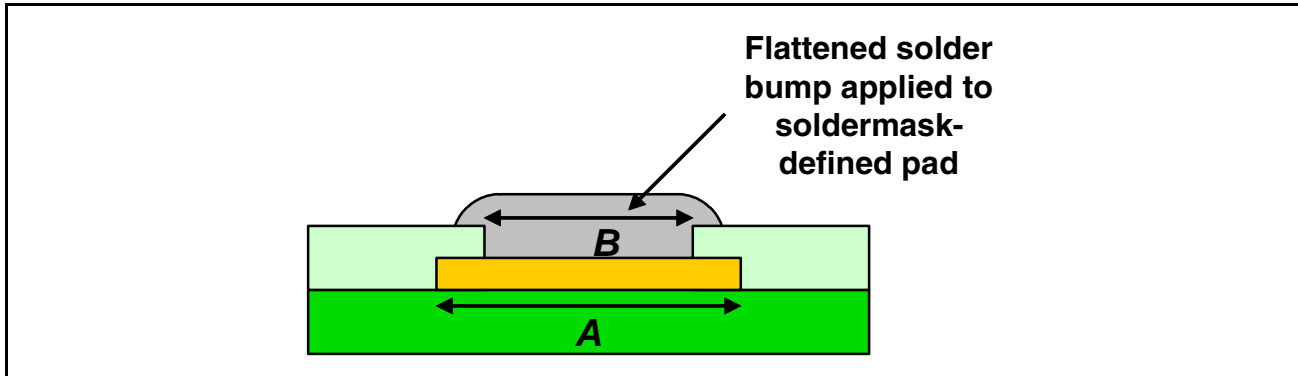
Laminate Pad Geometry for SMD Pad With SOP
